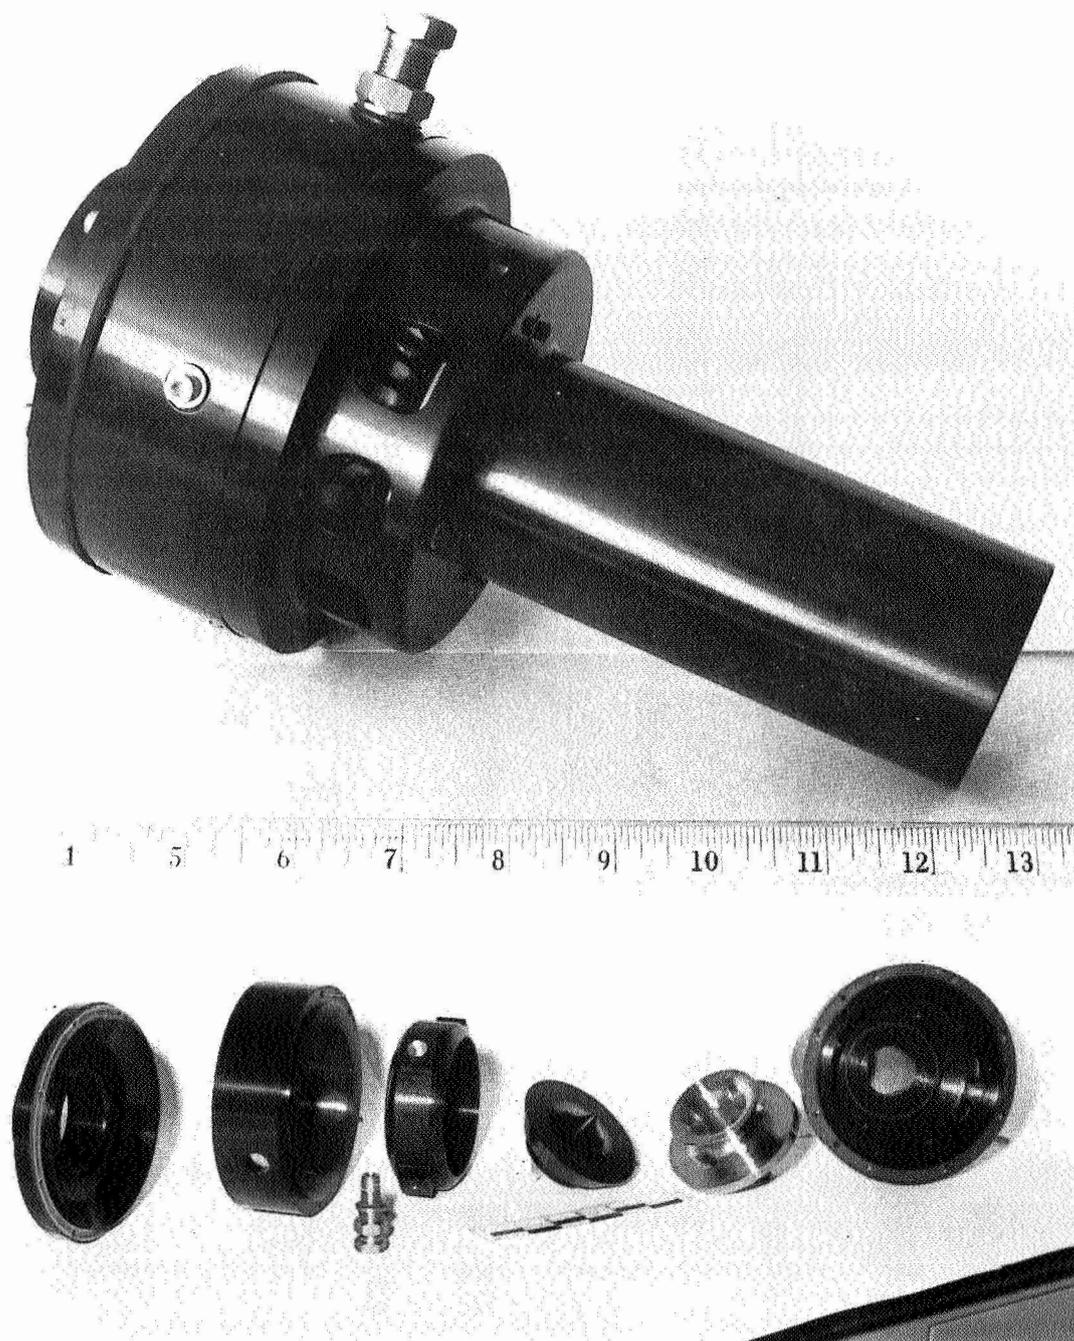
HYDRAULIC AXISYMMETRIC DIVERTER ASSEMBLY (UPPER) , EXPLODED VIEW (LOWER)
